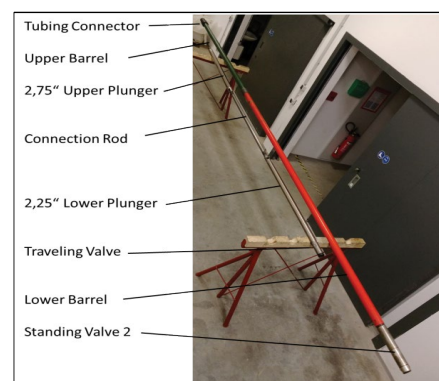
2.75/2.25 inches x 1.5 m hydraulic pump prototype.
